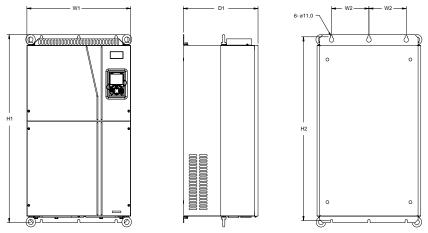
Wall installation diagram of VFDs of 460V 132–200kW Table C-1 Wall installation dimensions of 220V 0.75–55kW (unit: mm)
